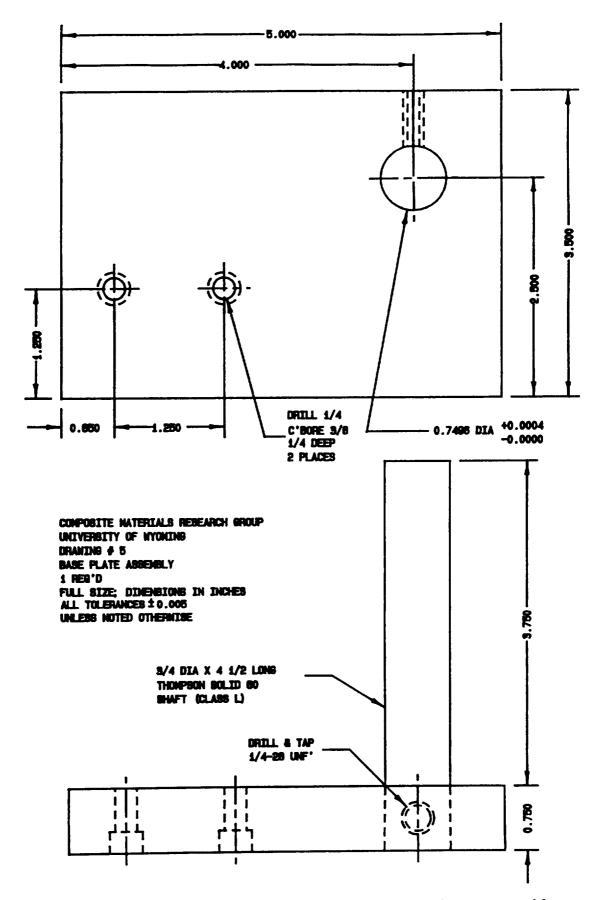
Iosipescu Shear Test Fixture Base and Post Assembly.
